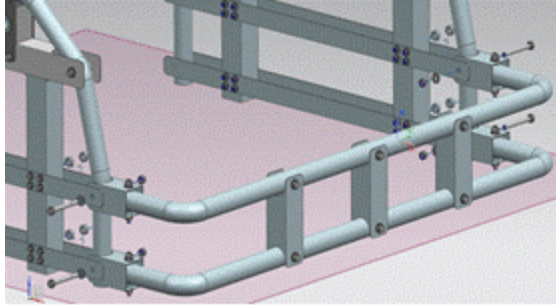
side base and rear part assembly with plain washer, hex nut and hex bolt
